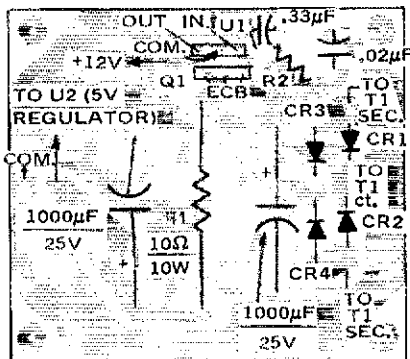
Parts placement guide for the power supply circuit board, not shown at actual size. These views show the component side of the board. R2 is mounted vertically. R1 and the four diodes, CR1 through CR4, are spaced approximately 1/4 inch above the board surface to aid in their cooling.
